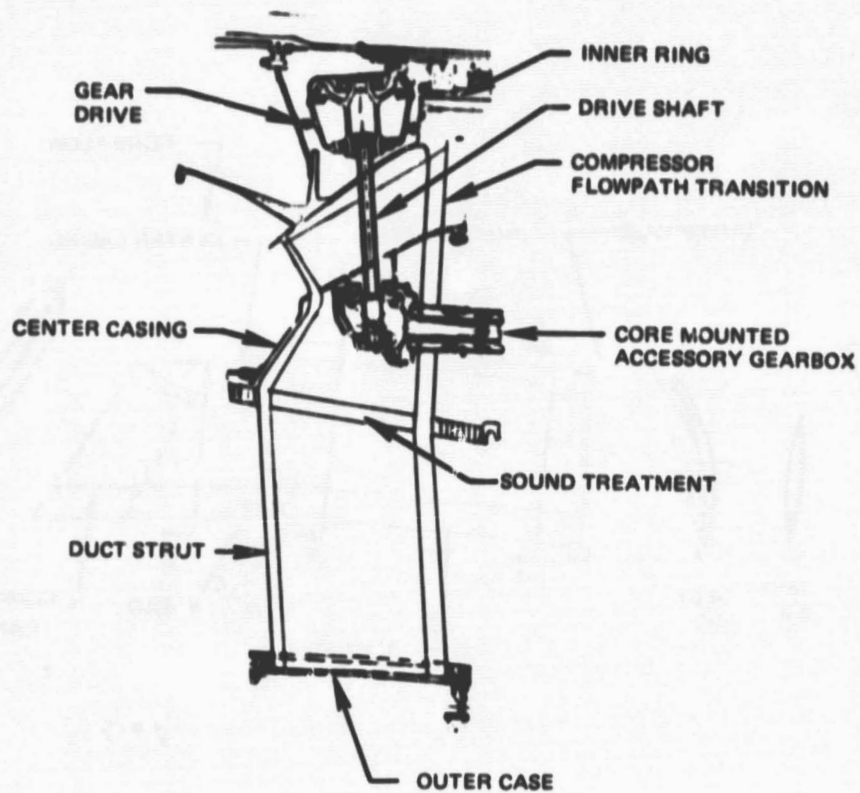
Compressor Intermediate Case Bottom Strut. Cross-section view shows accessory drive design.
